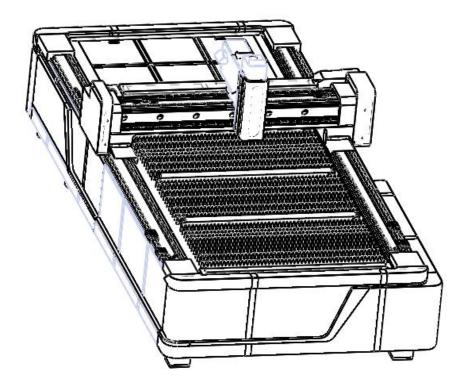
External view of F series cutting machine (subject to material object)
